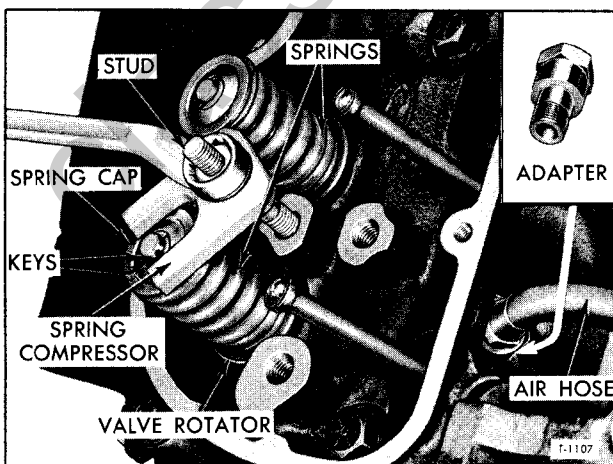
Use of Special Tool for Replacing Valve Spring without Removing Cylinder Head
